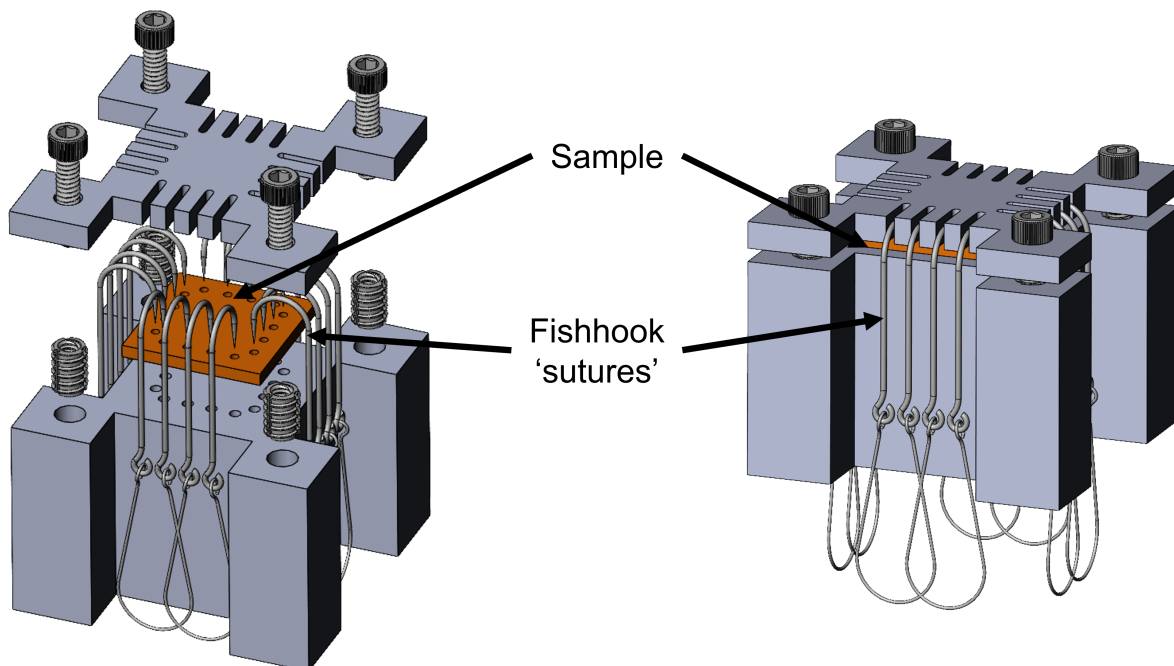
3D rendering of the suture placement jig. The sample is gently held in place by tightening the screws, and the fishhooks are placed with the help of the guides on the top plate and pierce through the holes in the bottom piece.
